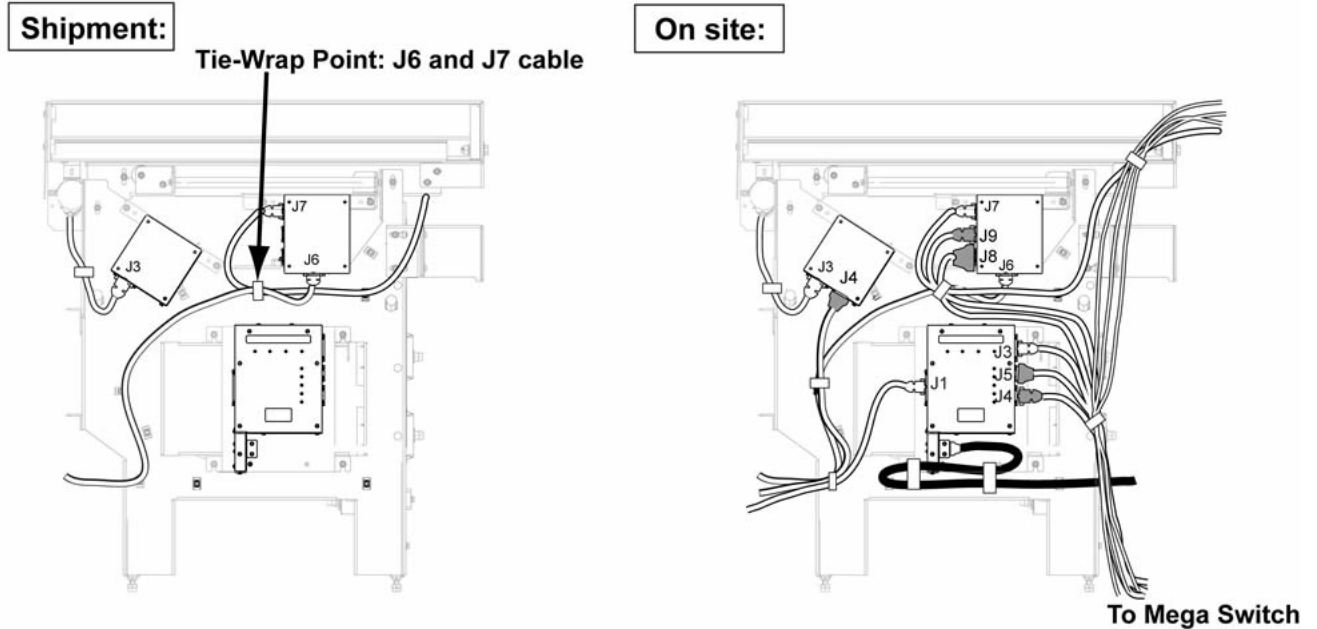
Rear Pedestal Cable Wiring on right side
